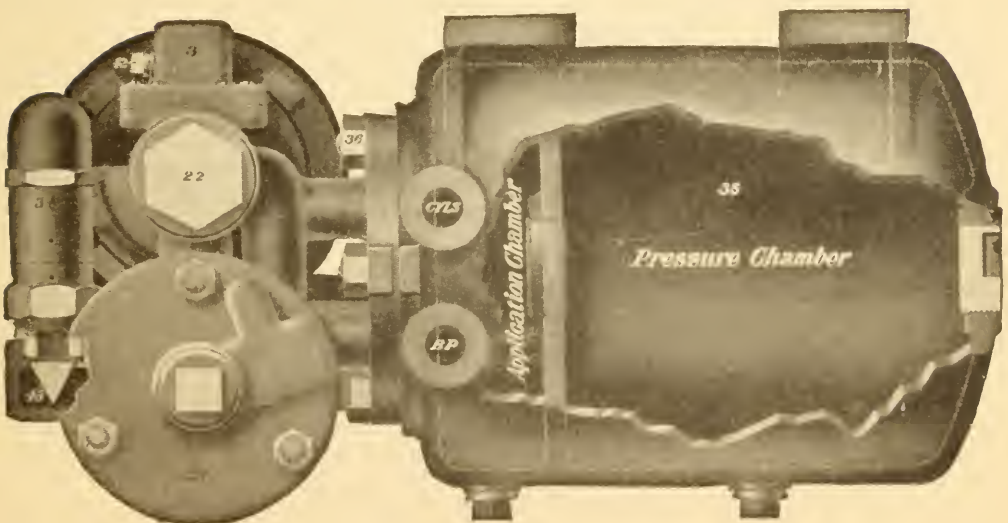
No. 6 Distributing Valve and Double-Chamber Reservoir, with Pressure Chamber Cut Away
